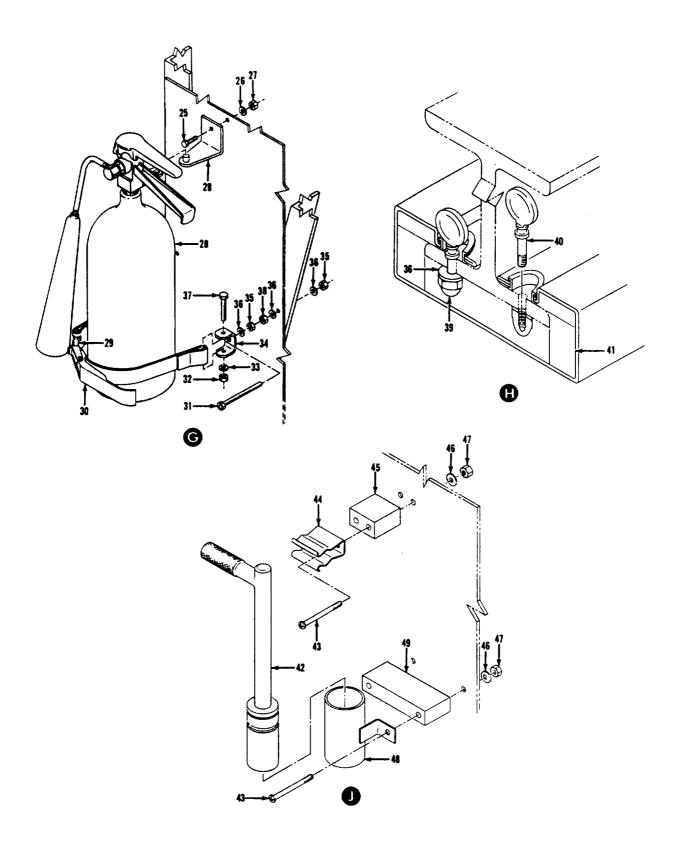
Equipment Installation (Sheet 4 of 25)
